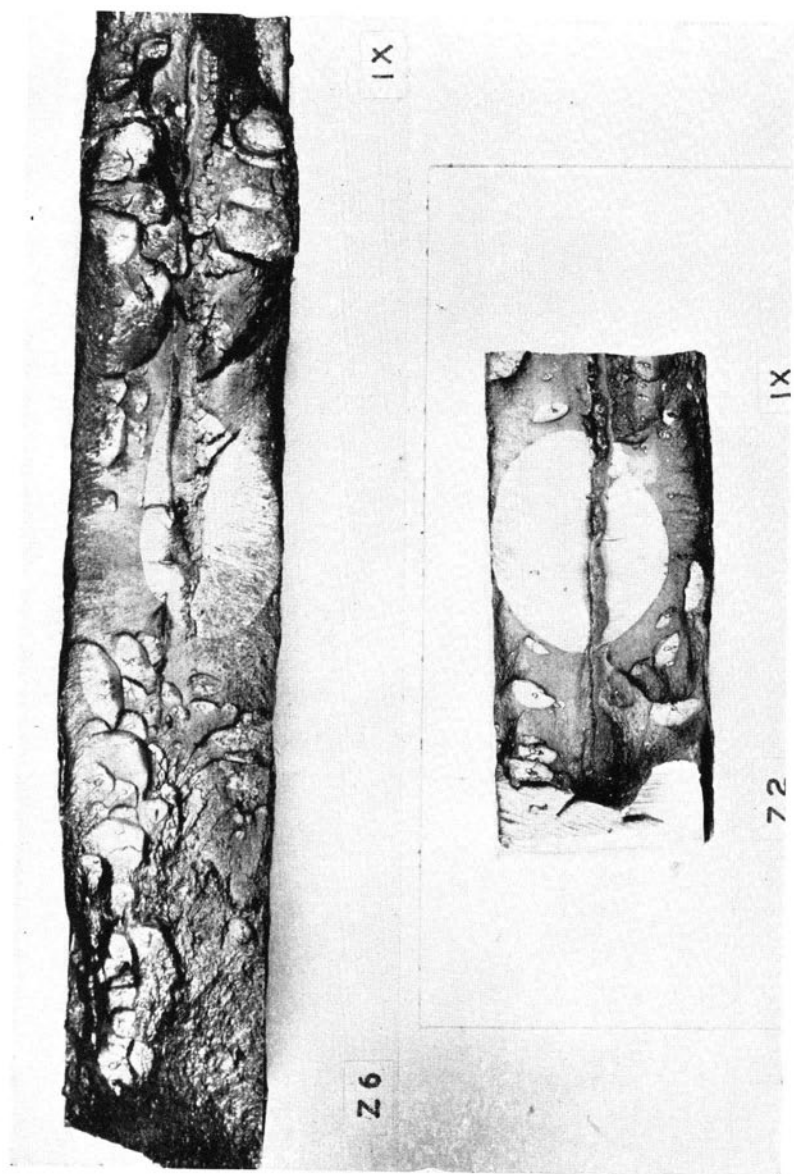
FRACTURE SURFACES OF SPECIMENS Z2 AND Z6 SHOWING LACK OF ROOT PENETRATION
